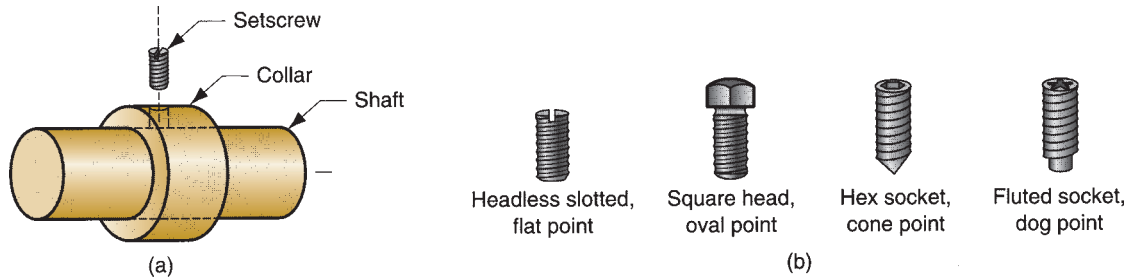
(a) Assembly of collar to shaft using a setscrew; (b) various setscrew geometries (head types and points).
